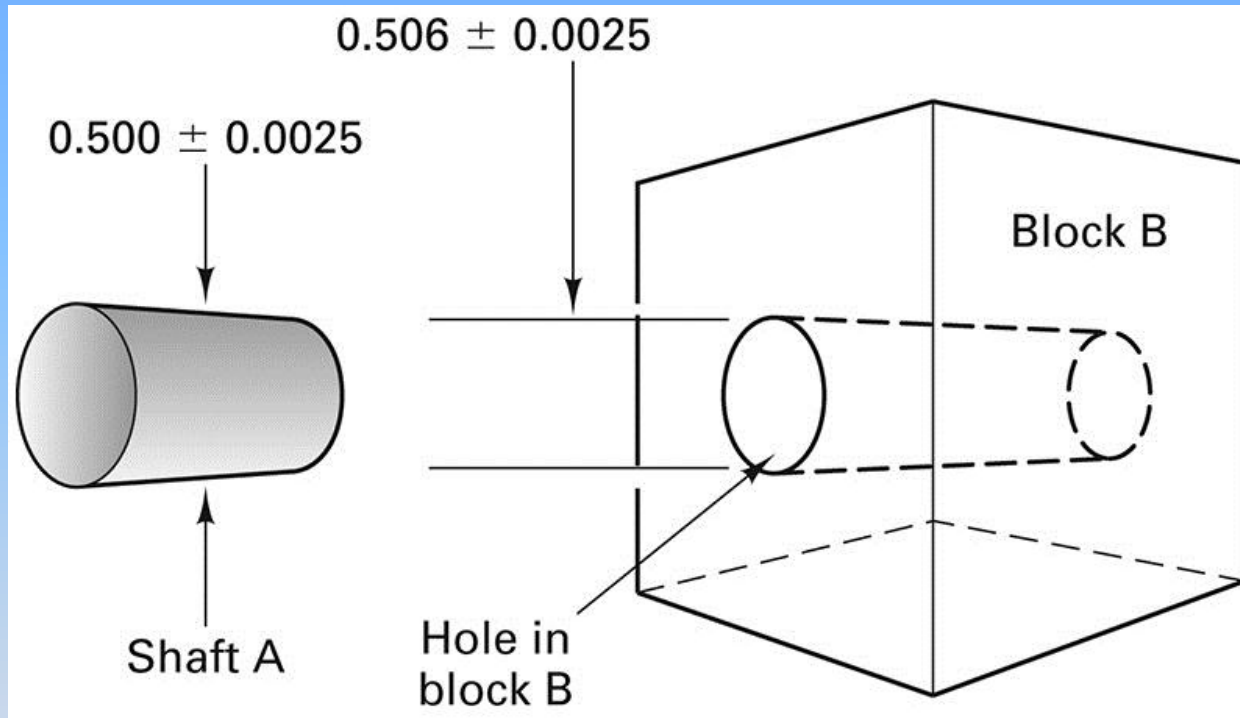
When mating parts are designed, each shaft must be smaller than each hole for a clearance fit.
